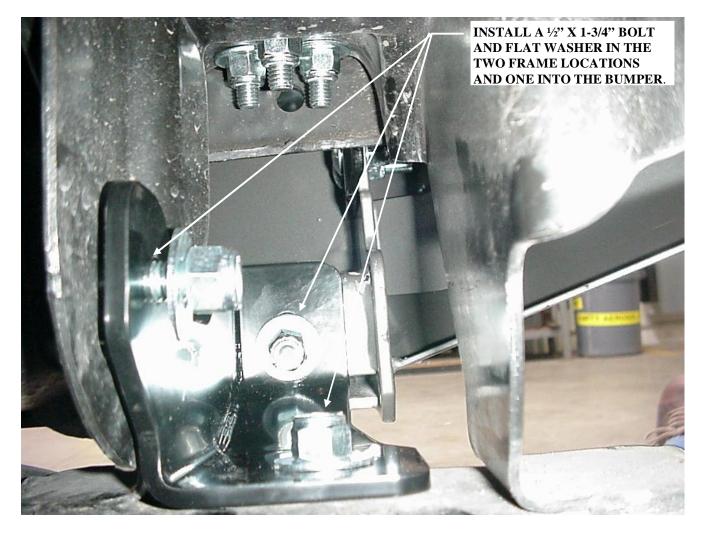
View from behind blocker beam looking forward. Passenger's side shown.
